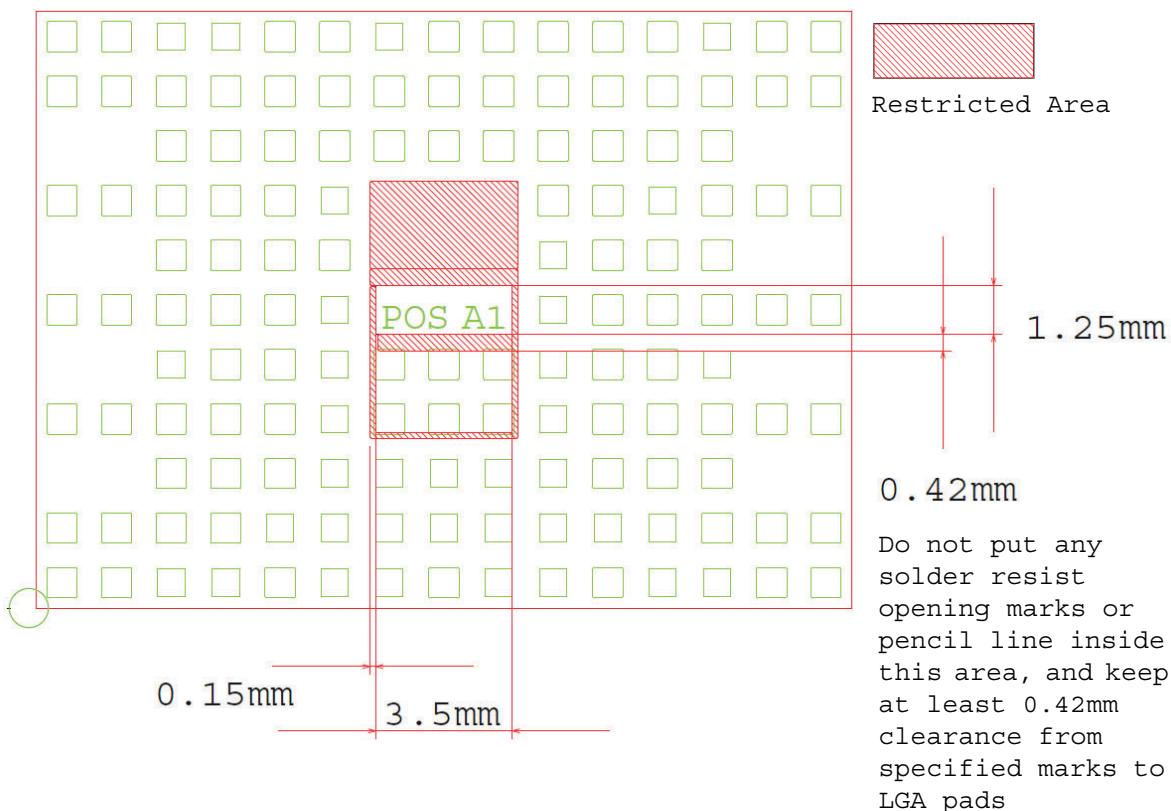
Dimensions of area for possible markings TX82-W, TX82-W-B, TX62-W-B and TX62-W-C (bottom view)
